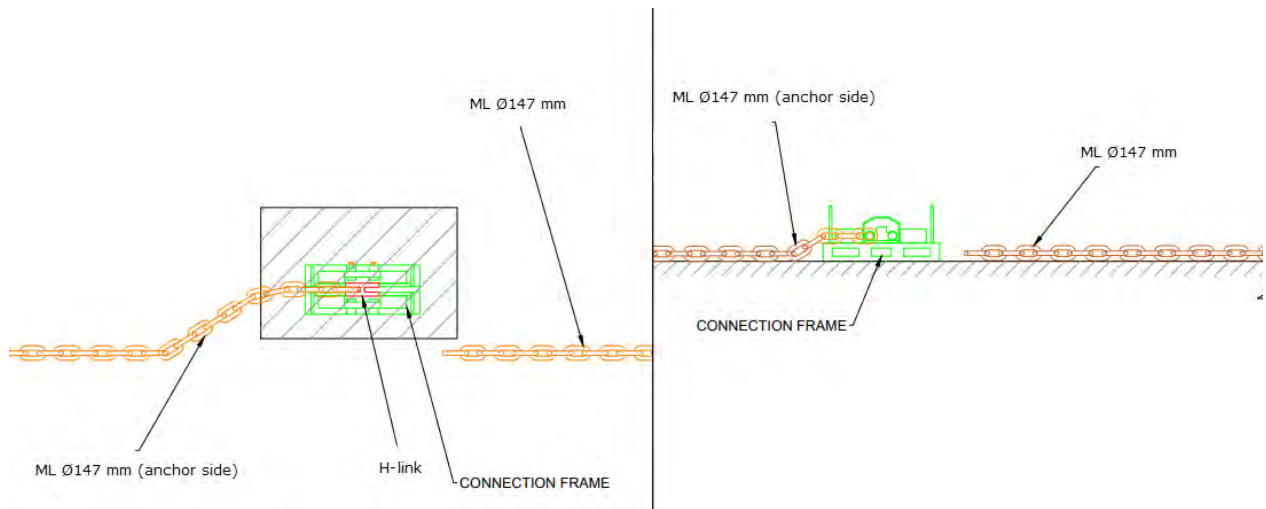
Installation of SCF and connection of ML#2 (anchor side from cut point)
